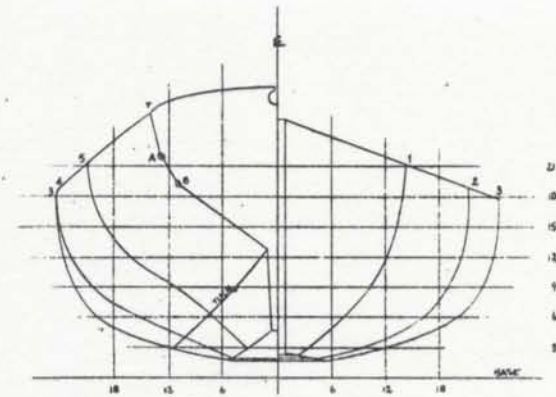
Construction plan of Rhodes wherry. (Drawing by Walter J. Simmons)
